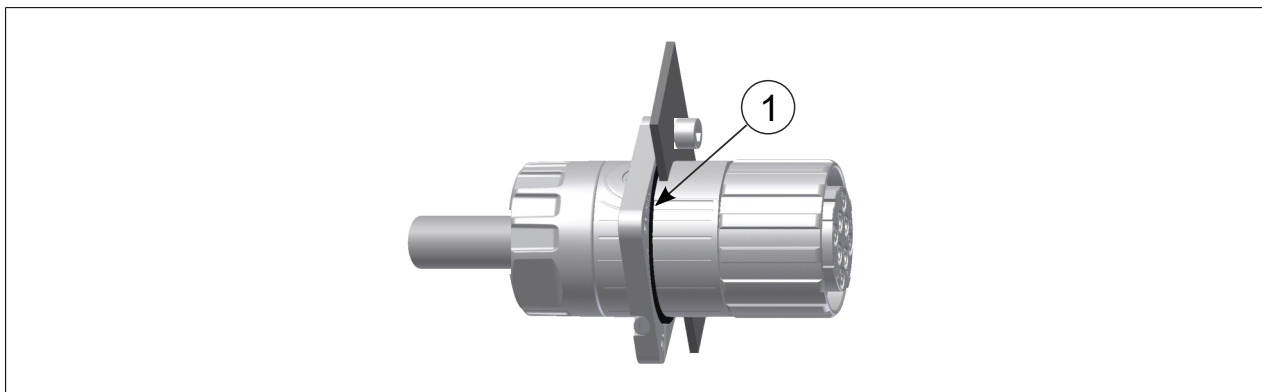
Attaching the metal flange to the connector (rear panel installation)
